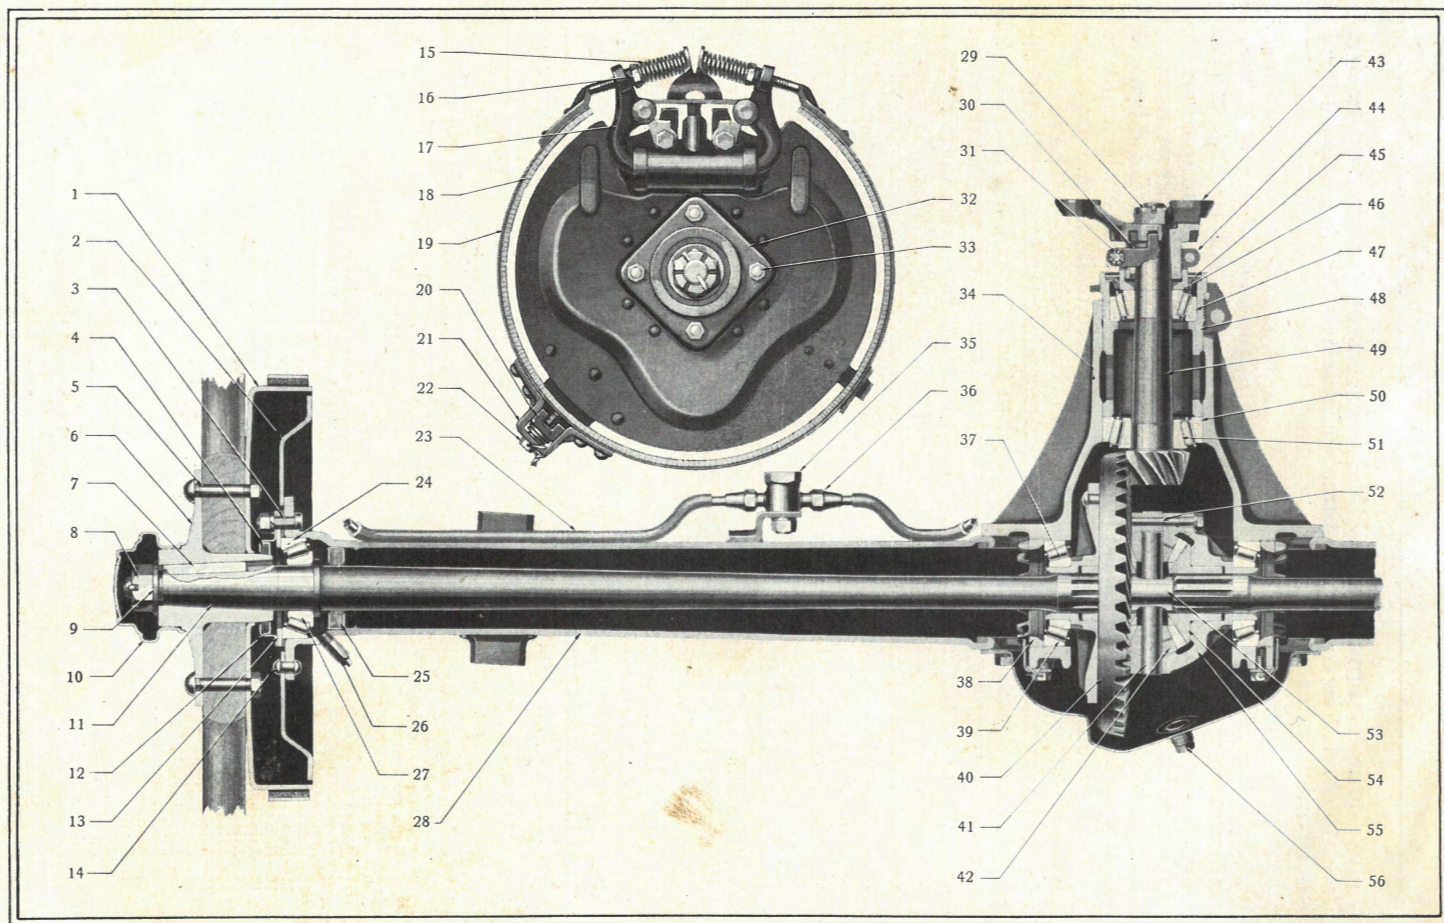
Rear Axle—Hydraulic Four-Wheel Brakes
